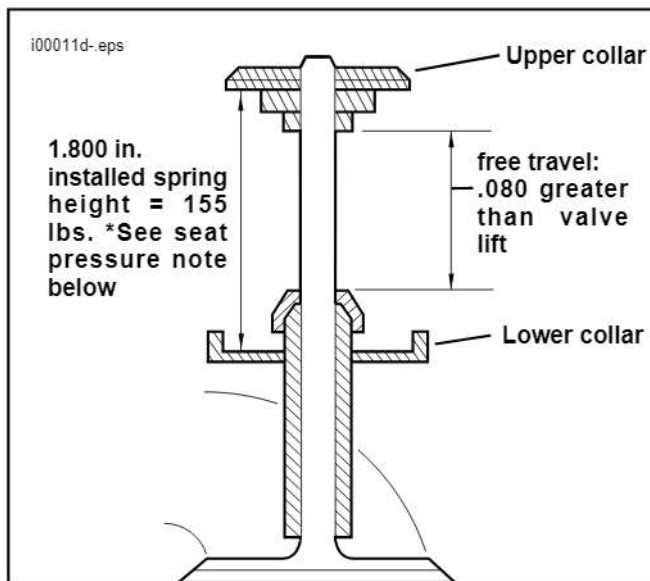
Valve Free Travel Check and Installed Valve Spring Height
